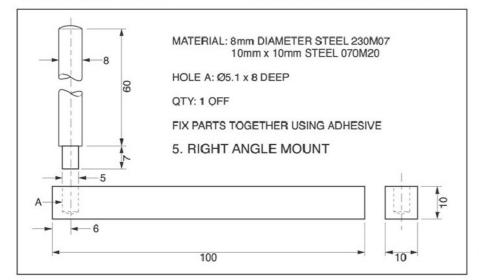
A simple Angle Mount is one way of mounting a DTI on the lathe.
